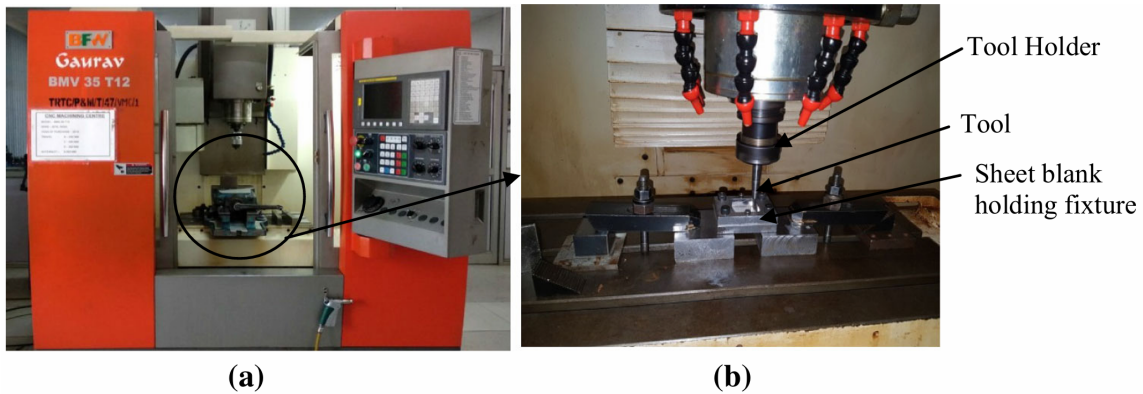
SPIF setup using a conventional 3 DoF CNC milling machine: BFW model BMV 35 T12 [13]
